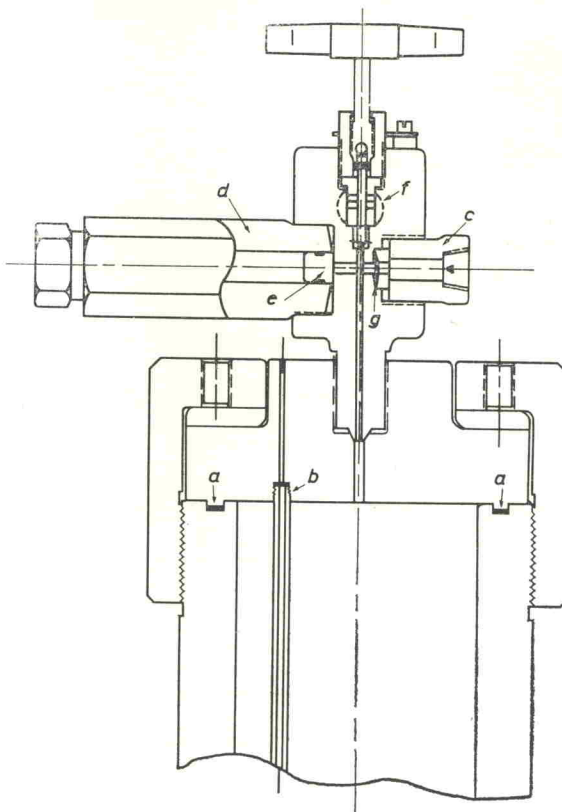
Multipurpose valve in reactor head (a) head gasket; (b) thermowell gasket; (c) rupture assembly; (d) gauge isolator; (e) 'Teflon' piston; (f) gas connexion; (g) rupture disc
